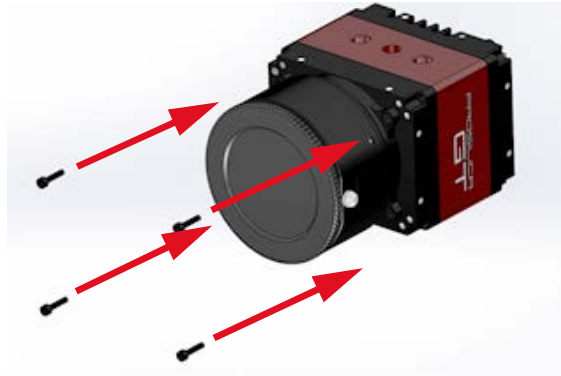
Inserting the four M2 x 10 socket head cap screws of the front assembly
